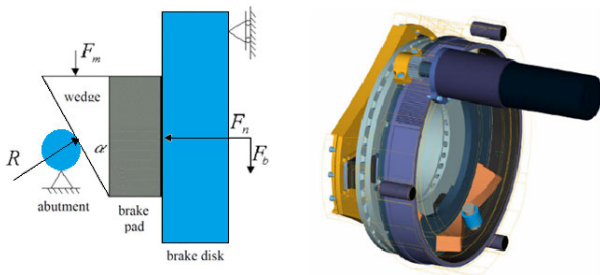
Mechanical model and CAD model of first prototype eBrake [7].
